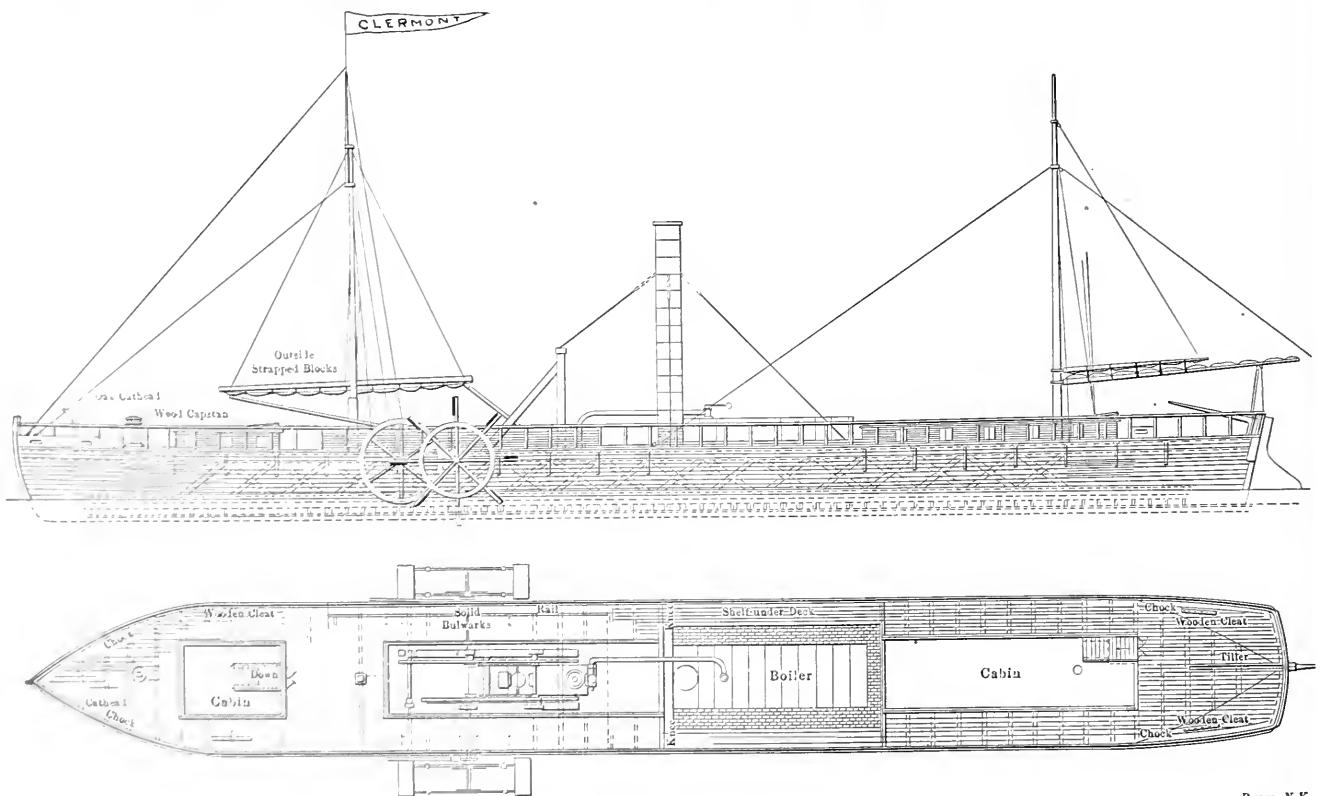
PLAN VIEW AND SIDE ELEVATION OF THE "CLERMONT"
